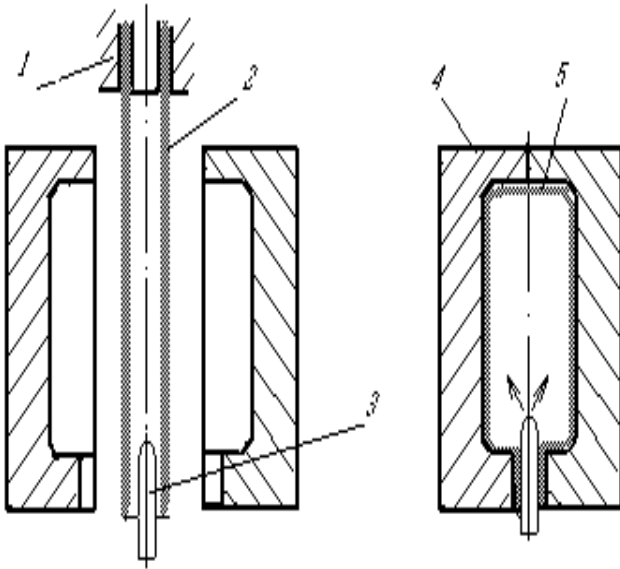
Scheme of extrusion-blow molding process. 1- extrusion head, 2- extrudate, 3- in-flatable nipple, 4- mold, 5- molded article.
